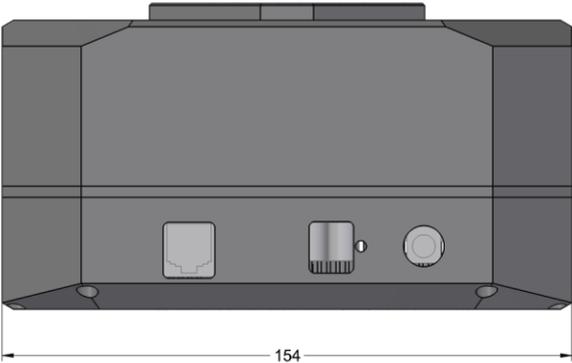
C3 camera head with Internal filter wheel bottom view dimensions
